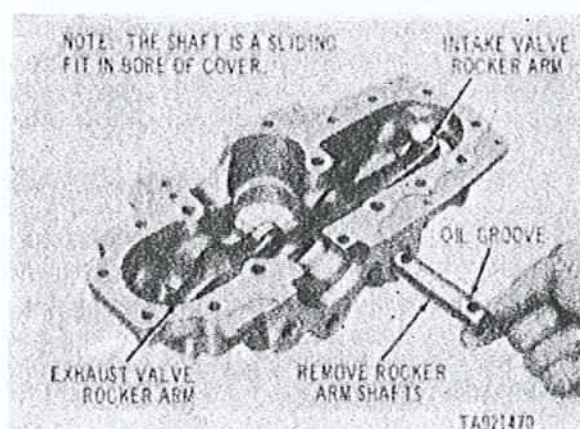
Removing valve rocker arm shafts and valve rocker arms.
